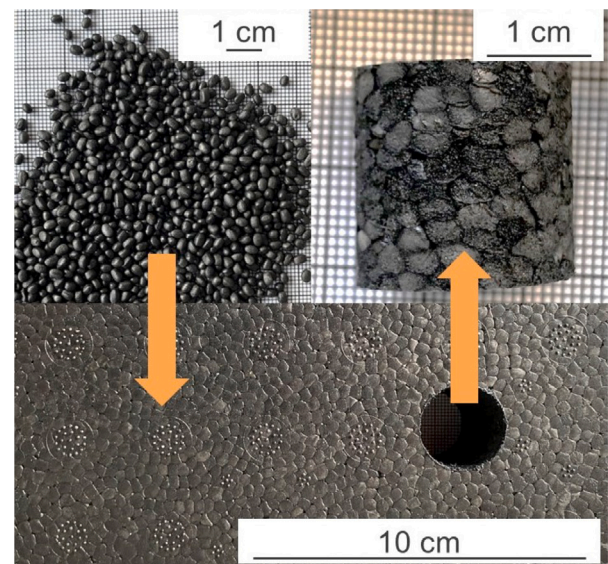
Test sample production from beads, to welded plate and to the extracted test sample.
